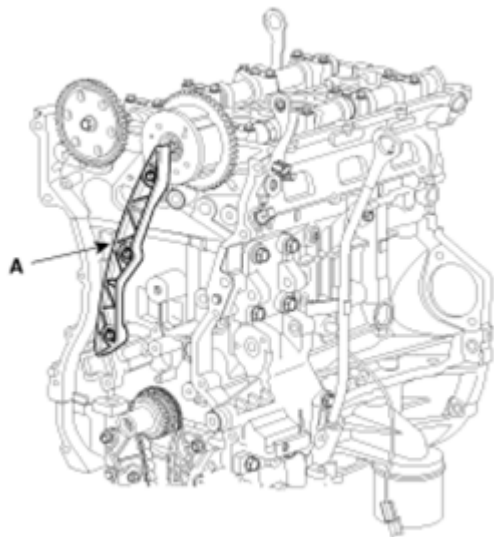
Identifying Timing Chain Guide (Single CVVT)
